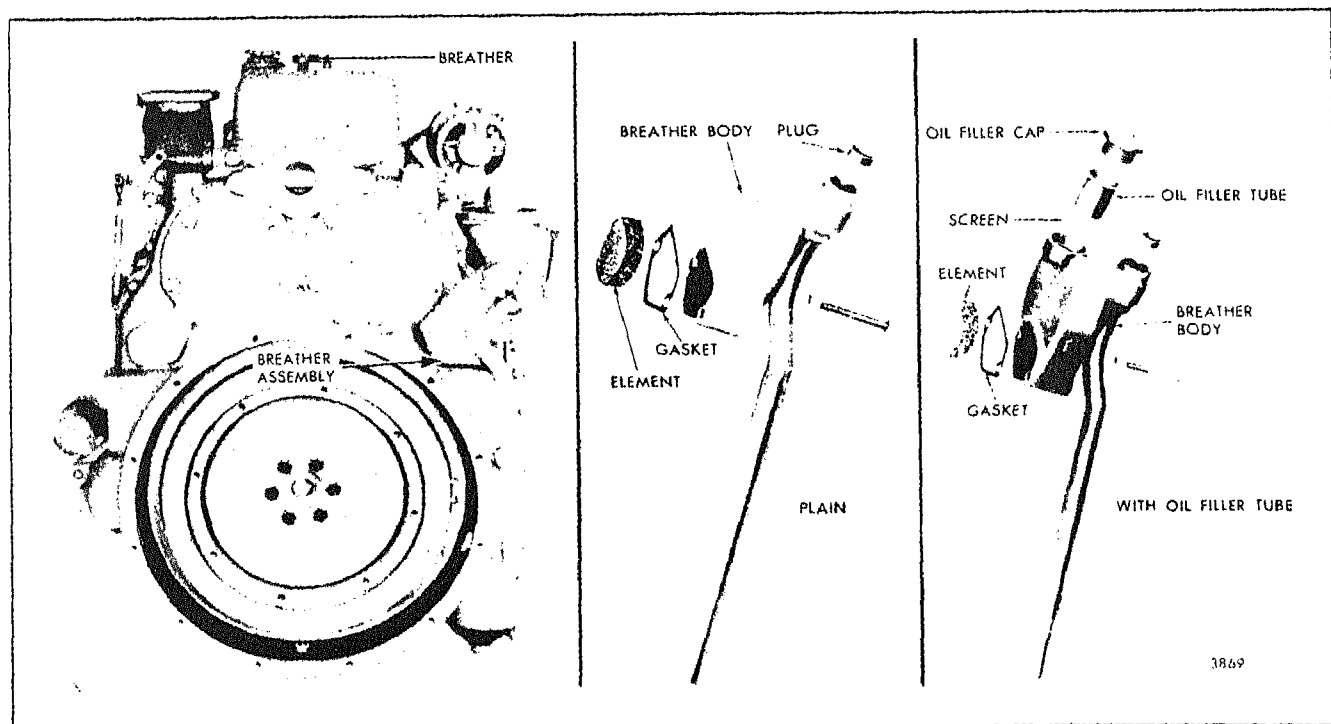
Crankcase Breather Mounting and Details (In-Line Engine)
